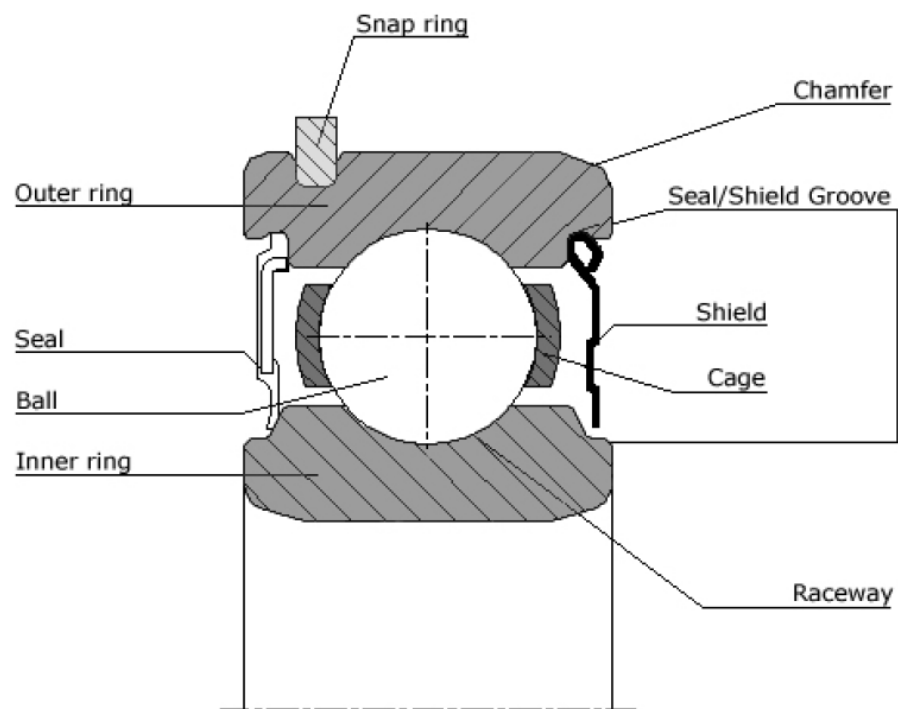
Designation of a radial ball bearing (ORS Bearings, 2005)
